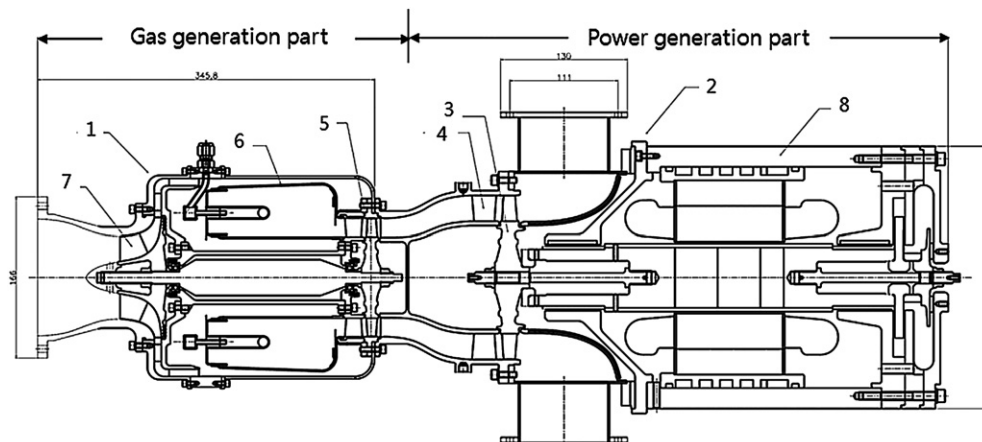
Layout of the home-made 100 kW class gas turbine: 1. gas generator, 2. power generator, 3. power turbine blade, 4. power turbine nozzle, 5. gas generator turbine blade, 6. combustor liner, 7. compressor impeller, 8. generator frame.
